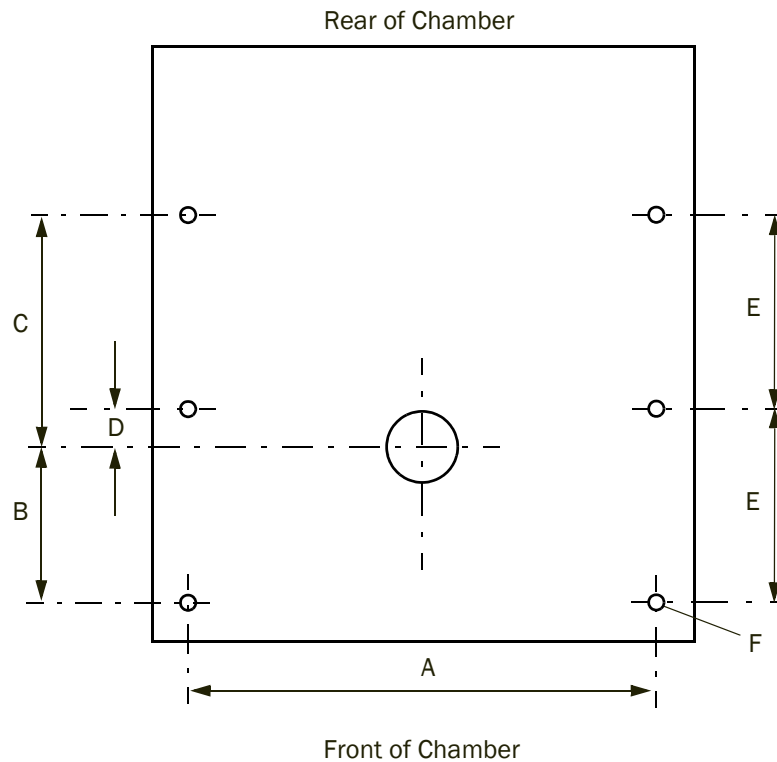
Chamber Fixing Holes/Lifting Points (viewed from above or below)
